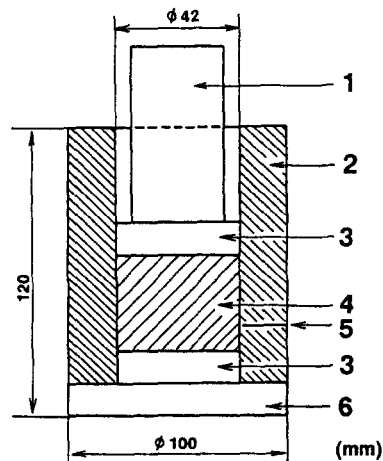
Die assembly for PLF: 1: stem, 2: container, 3: dummy block, 4: billet (sample), 5: thermocouple, and 6: bottom plate.
